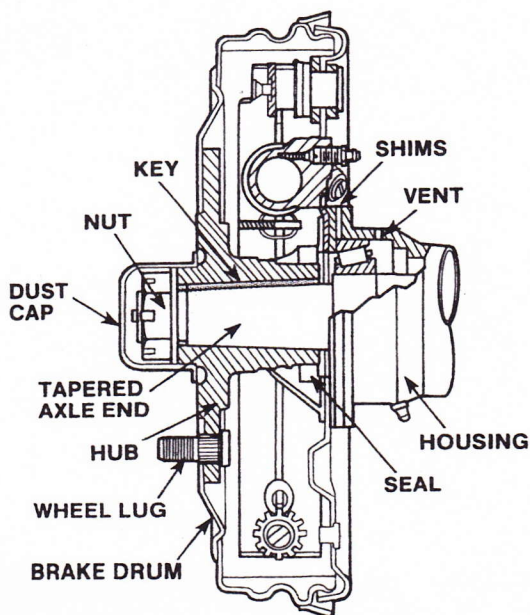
Typical rear wheel bearing assembly for a FWD vehicle. *Courtesy of Ford Motor Company
